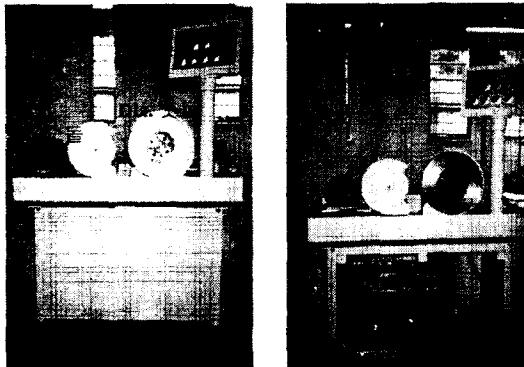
Dressing system for co-axial grinding machine of ferrule
